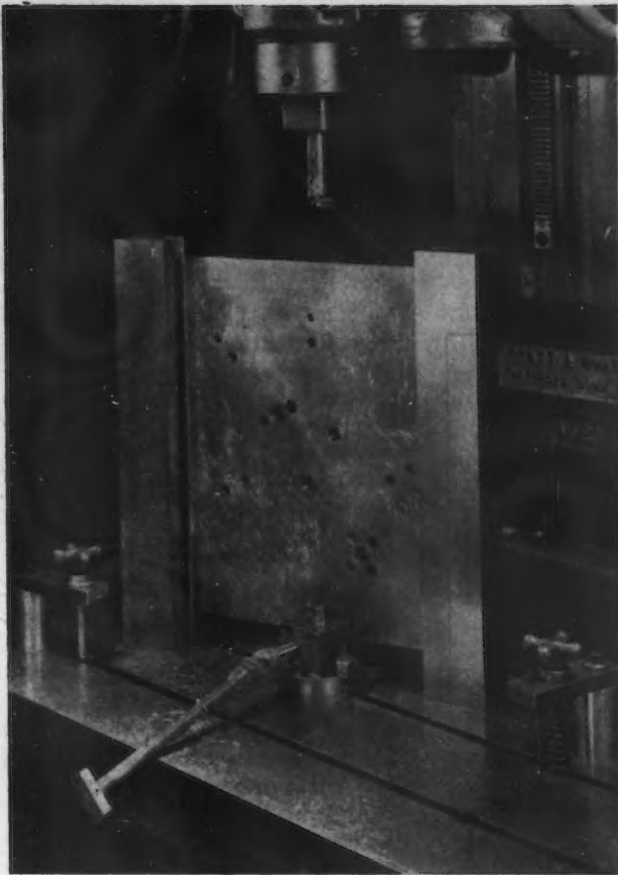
Index jig plate and taper lock bolt which is entered under spindle.
